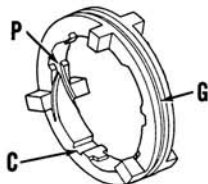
Inspect shift ring pressure plate grooves (P) and pin contact grooves (C) for any signs of excessive wear. Width of circumferential groove (G) must measure 6.0-6.3 mm.
